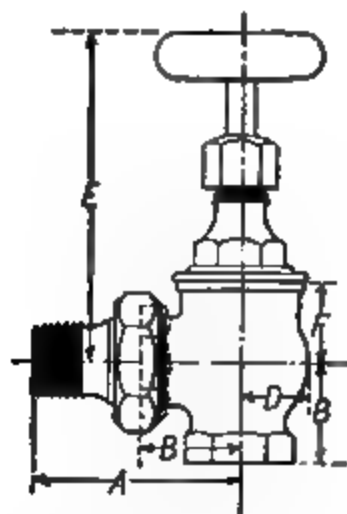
QUICK-OPENING HOT WATER RADIATOR VALVE.
